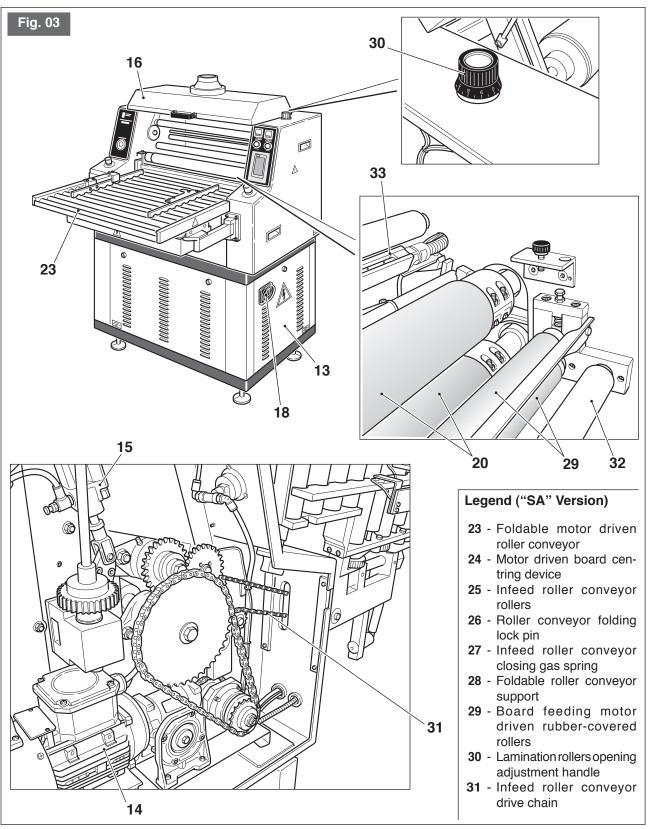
GENERAL MACHINE DESCRIPTION - "SA" Version
